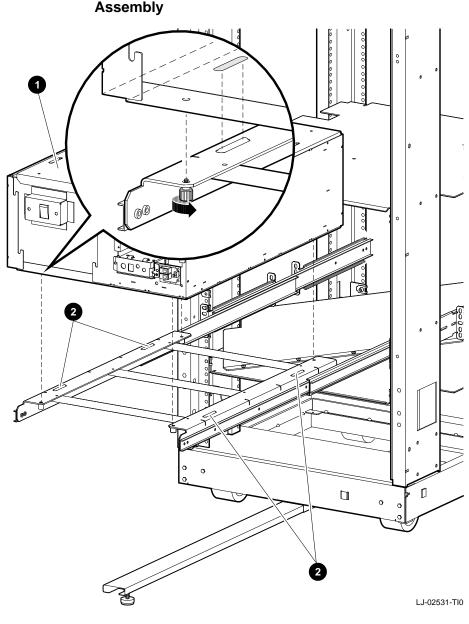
Securing the PE50A–B9/D9 Unit to the Chassis Slide Assembly
